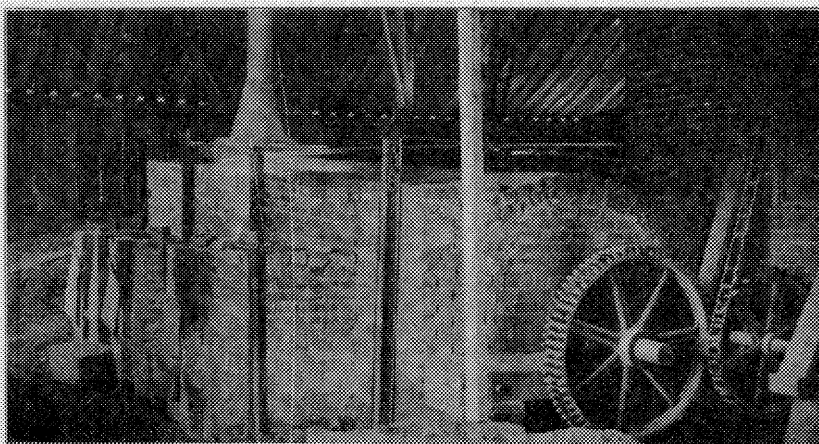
Home-made Rotary Dryer installed by the Detroit Roofing Tile Co.
